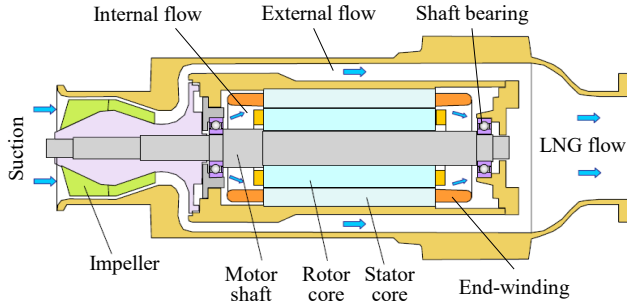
Submerged pump assembly for LNG applications using a cryogenic-cooled induction machine (adapted from [7]).
